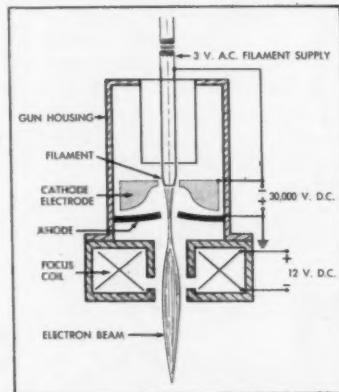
Electron gun used in beam welder, Fig. 1
